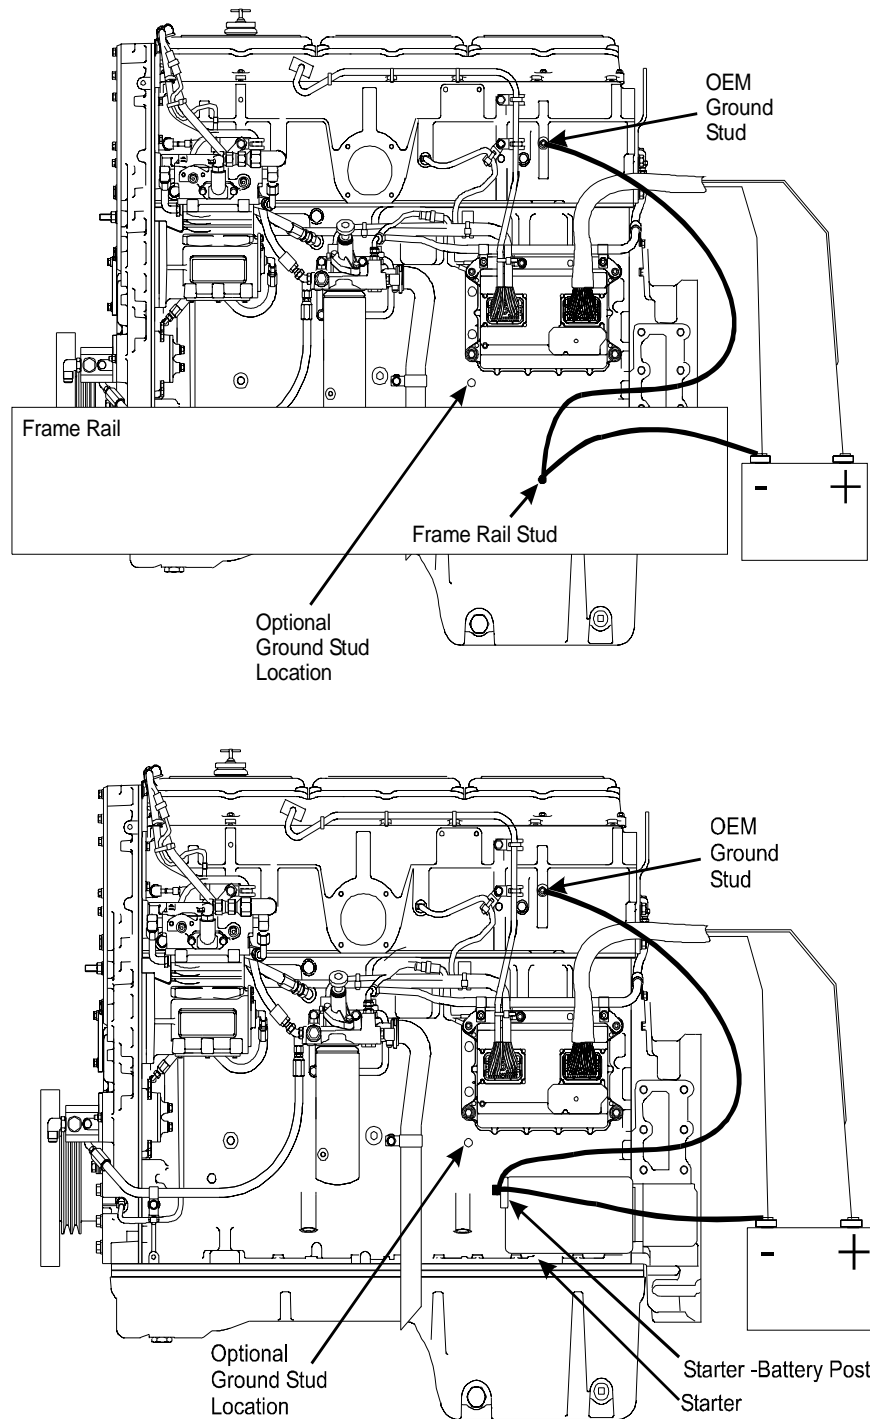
Ground Stud To Frame Rail and Ground Stud to Starter Connections
